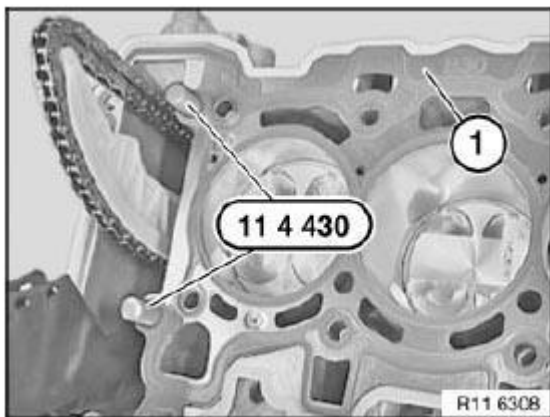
Inserting 11 4 430 Special Tool Into Bore Holes
